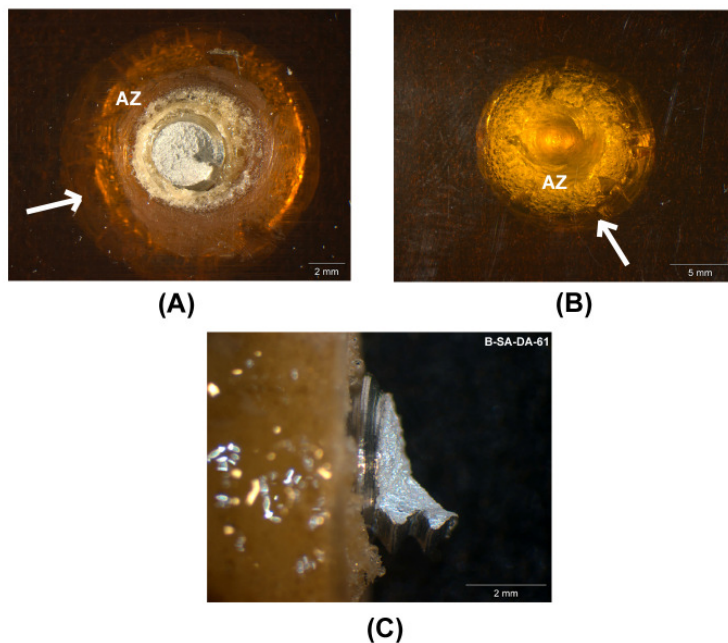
Example of a RE fracture type (TP-sample 8,0 bar). A) Top view of the fractured polymeric base plate, 18X. B) Bottom view of the fractured polymeric base plate, 12X. C) Close-up picture of the fractured rivet, 40X. In A) and B) AZ is the anchoring zone and arrows indicate the secondary stable cracking around AZ.
